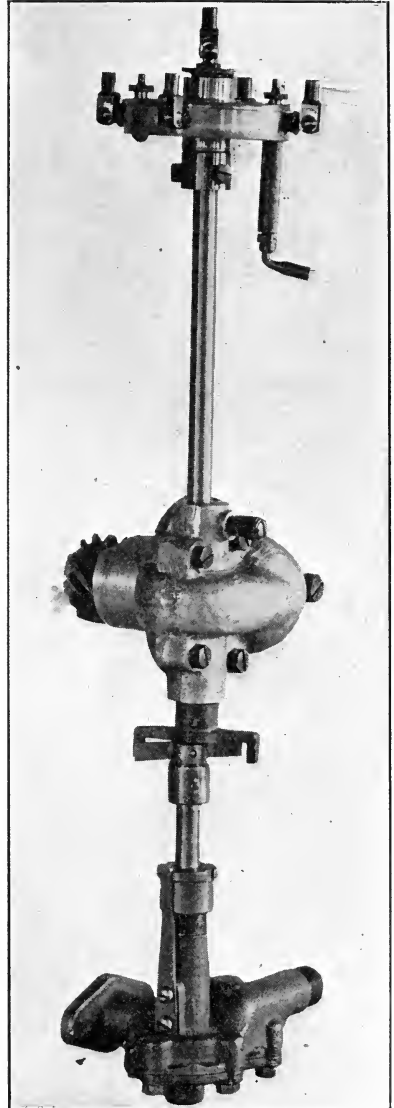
Auxiliary Shaft Used in Connection with Cam Shaft Driven from a Spiral Gear Turns Timer and Oil Pump.
